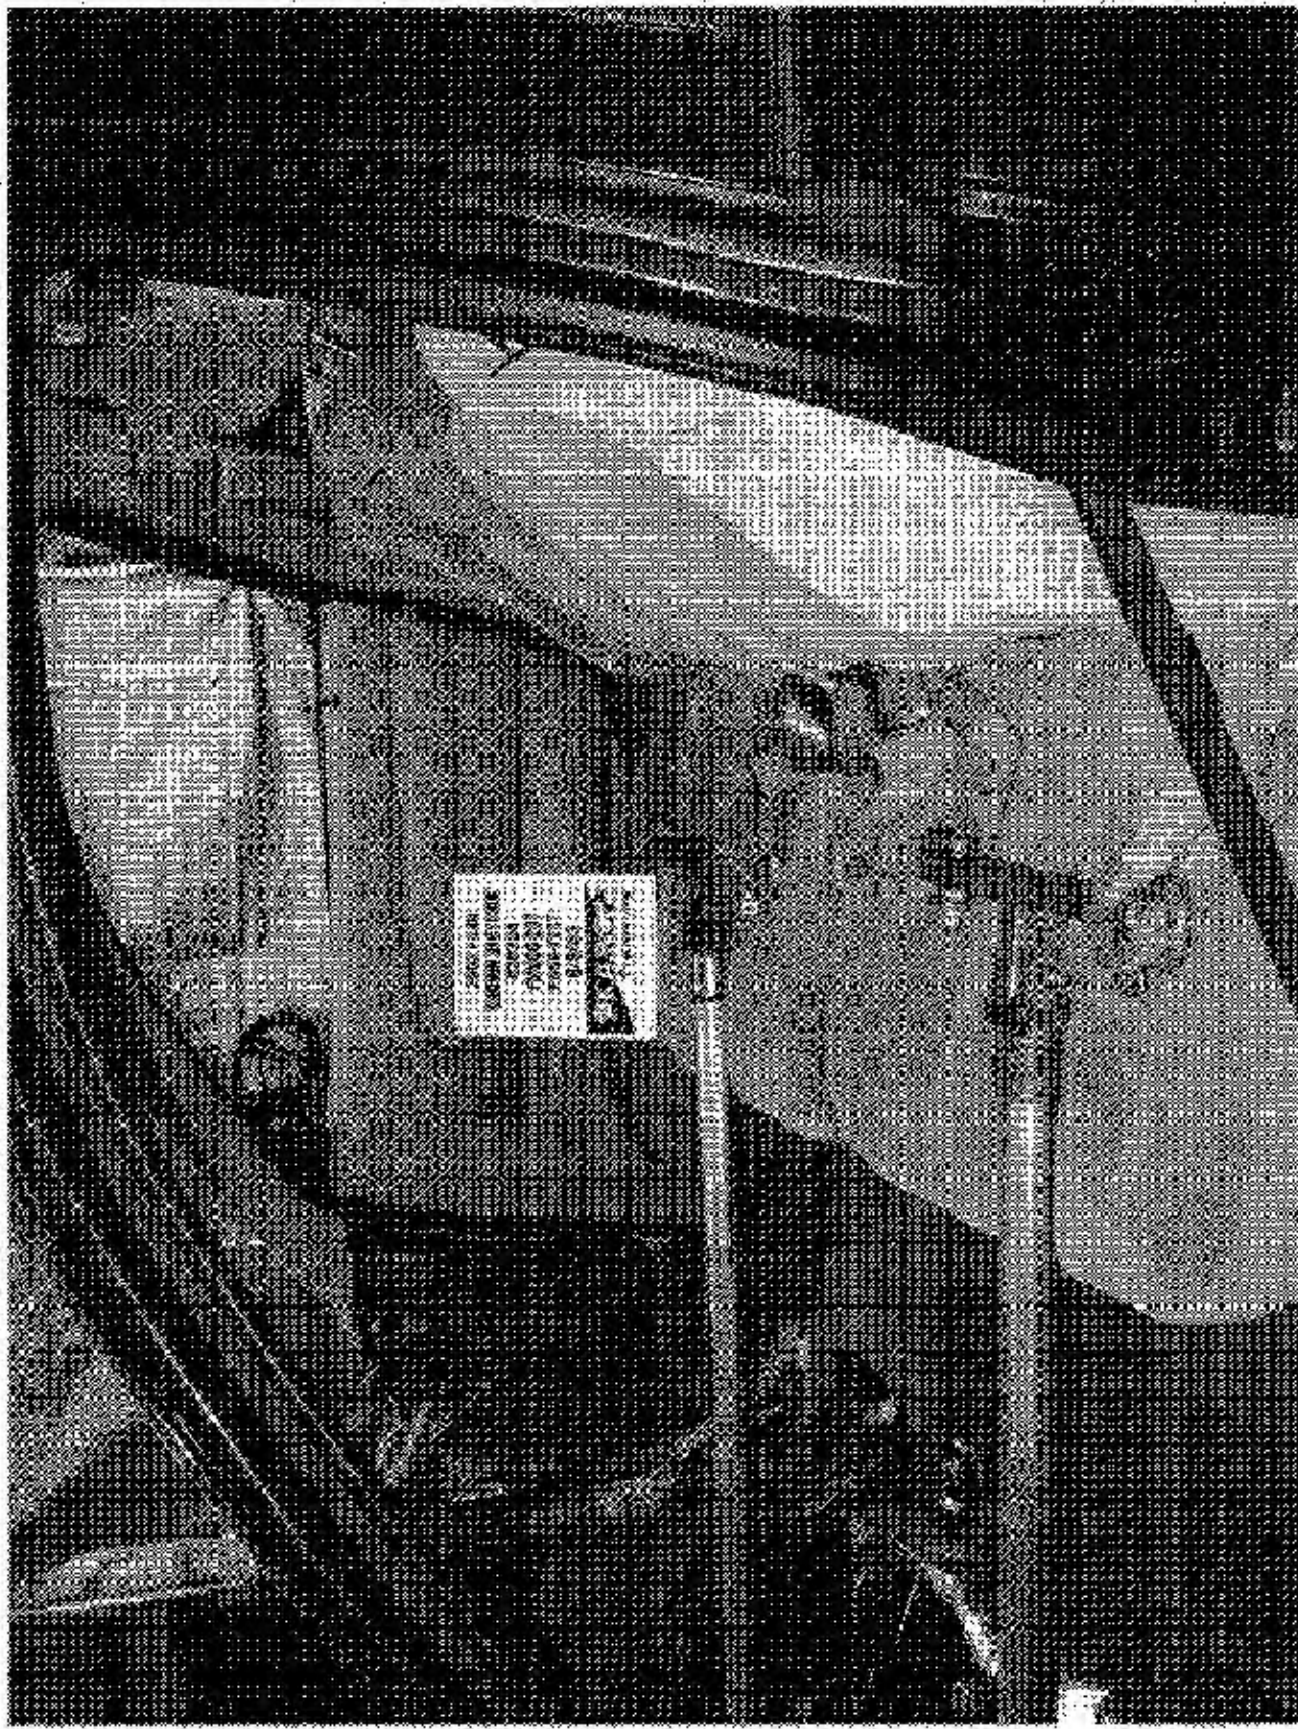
Forward Load on Seat Frame and Adjusters, Driver's Side, Post-Test
